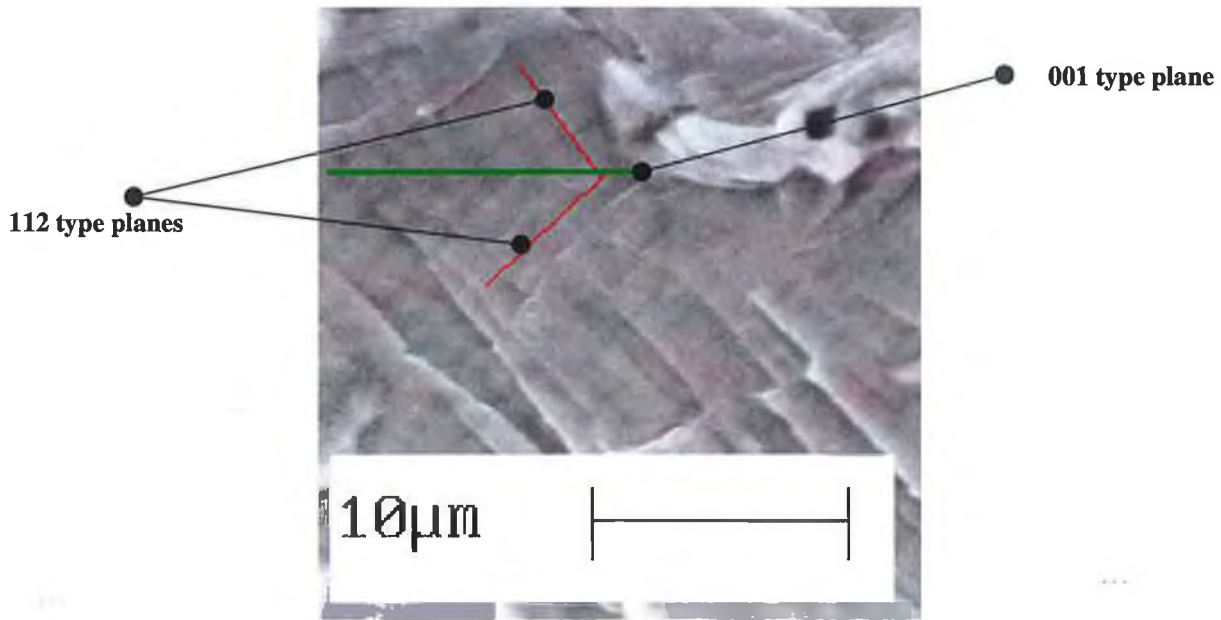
Twin boundaries and {001} & {112} type planes evident on fracture surface of GTA weld metal.
